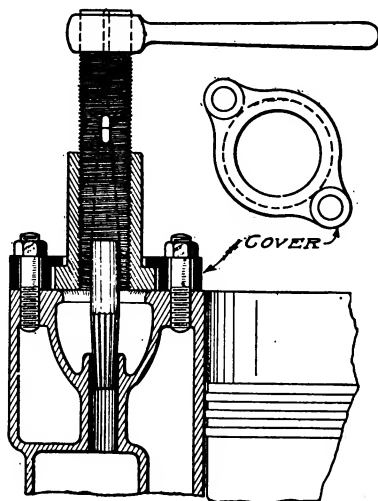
Rigging for Reaming Out Valve-Stem Guide Holes
